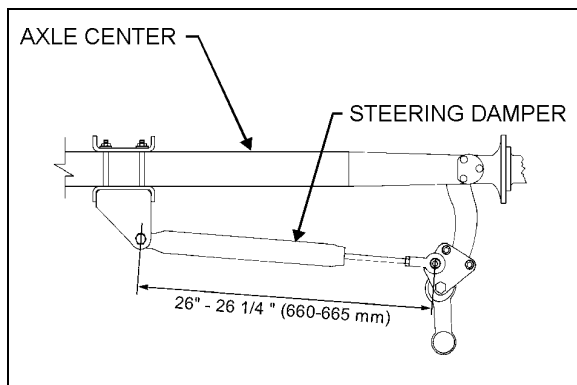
DAMPER BRACKET ADJUSTMENT 14019
